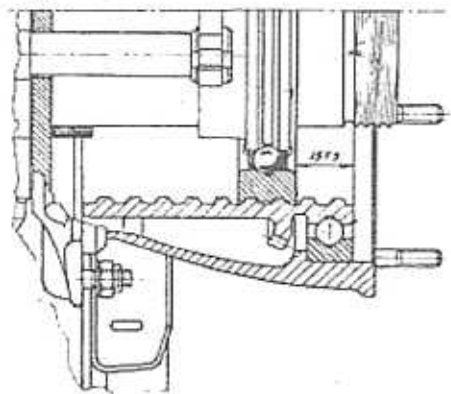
Diagram showing the setting of the propeller prior to mounting on the engine
